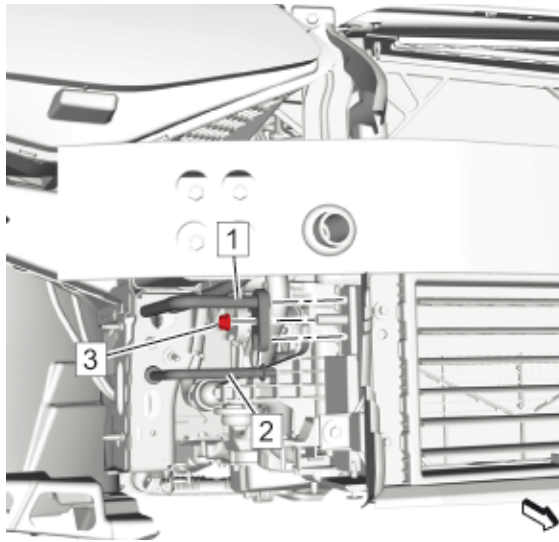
Air Conditioning Evaporator Tube, Condenser Tube And Nut
